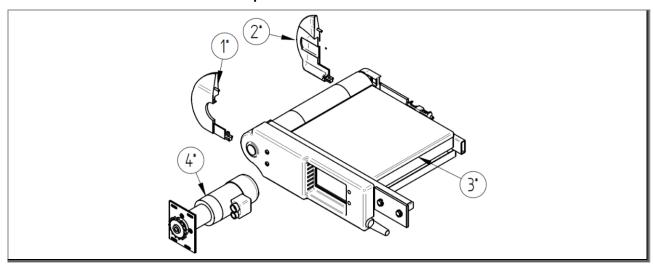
Parts list: Internal drive unit - position of drive unit 14 - ZZ.900.0145.00
